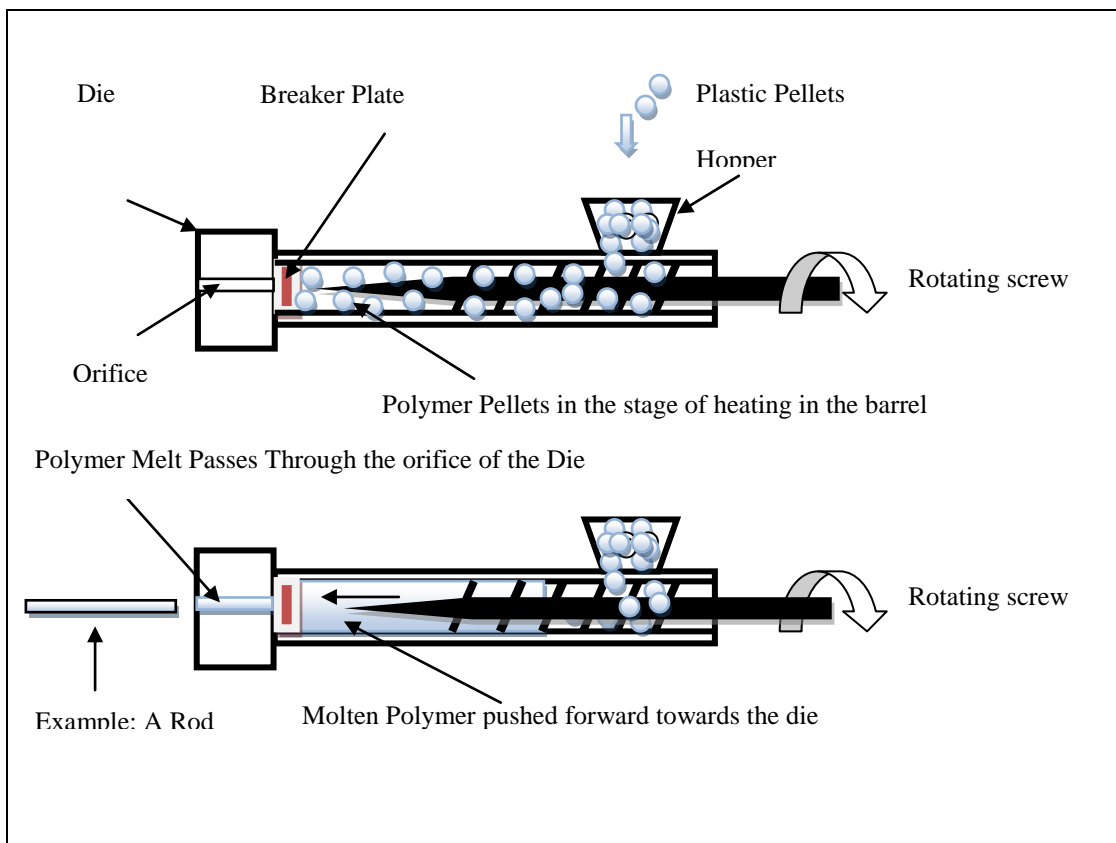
Schematic Representation of the Extrusion Moulding Process Steps
